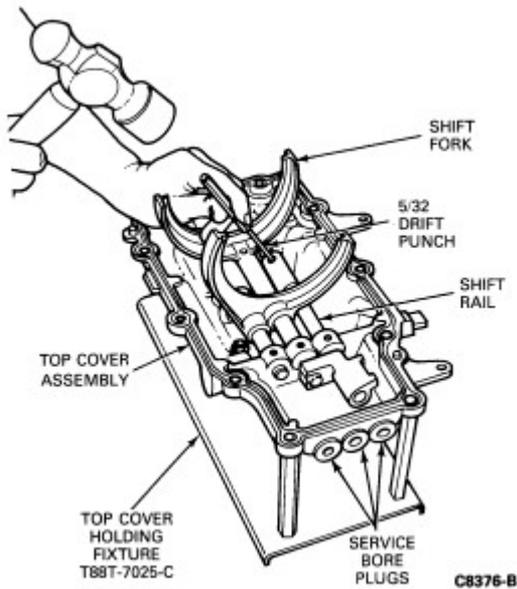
Removing Spring Pins Retaining Shift Forks To Shift Rail
